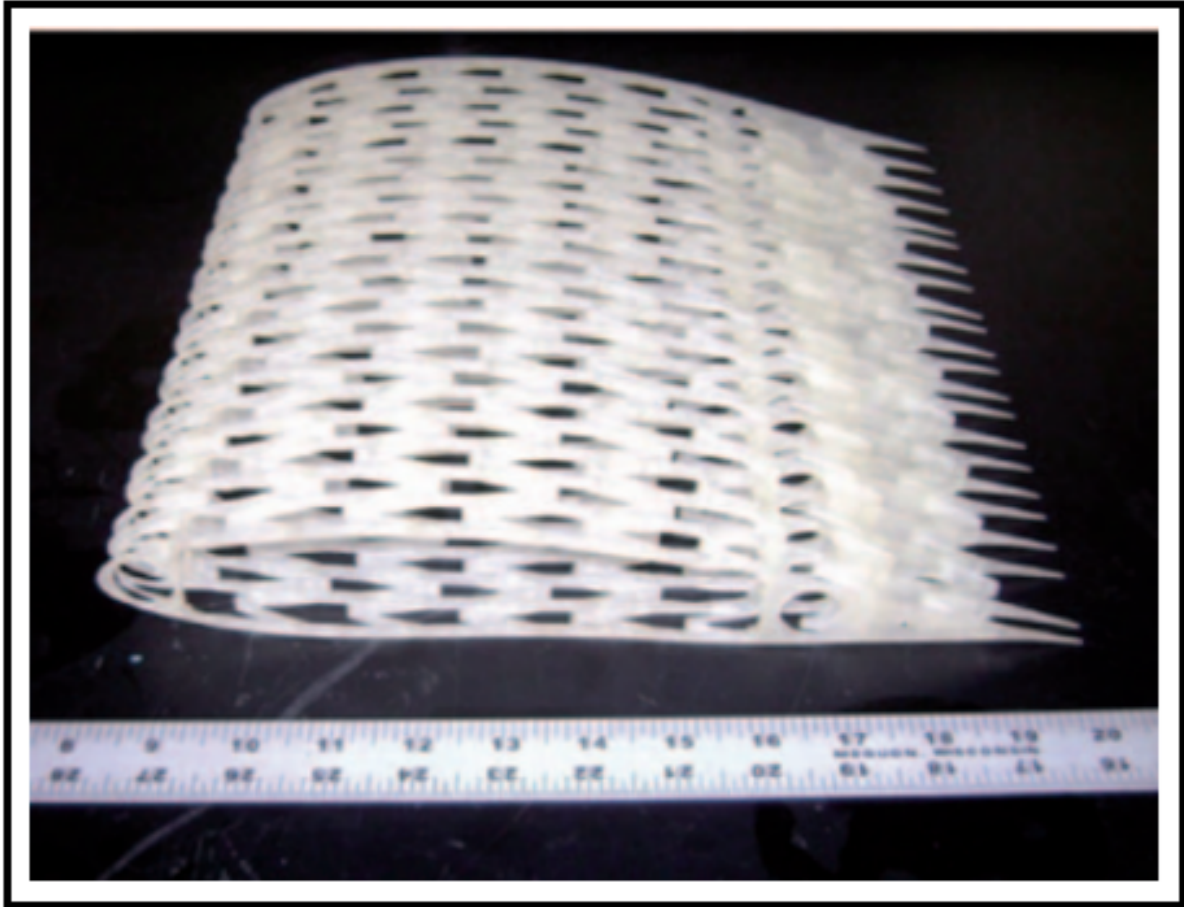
Morphing prototype fabricated by Vocke and colleagues [64].
